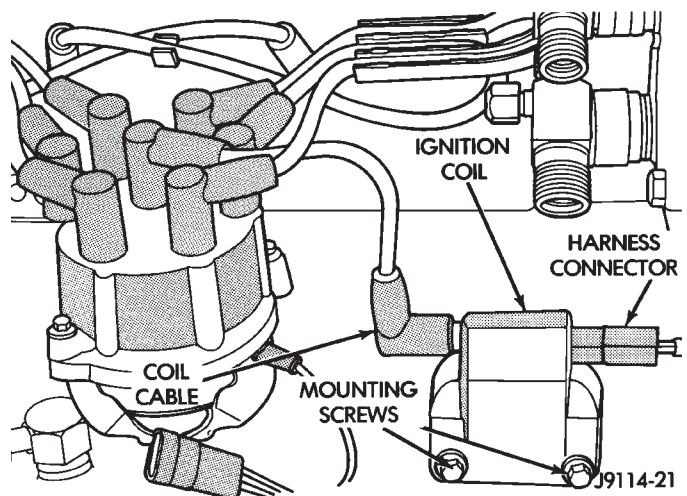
Ignition Coil—Typical (4.0L Shown)
